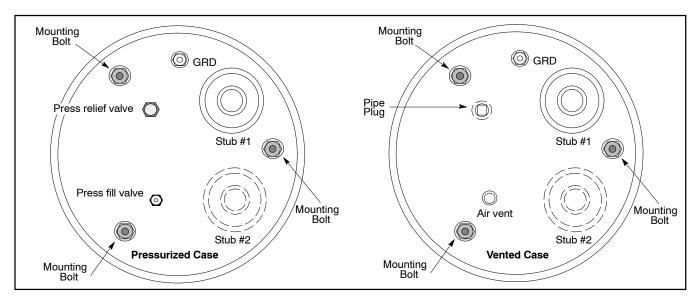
AC4306 Base Plates, Outside Bottom View, Looking Up
